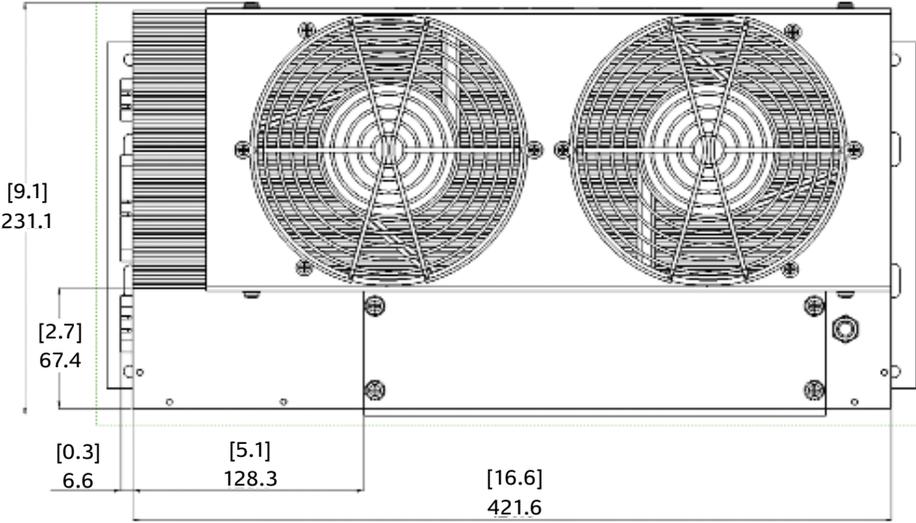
DMOC445 Air-Cooled Dimensions, Top View
